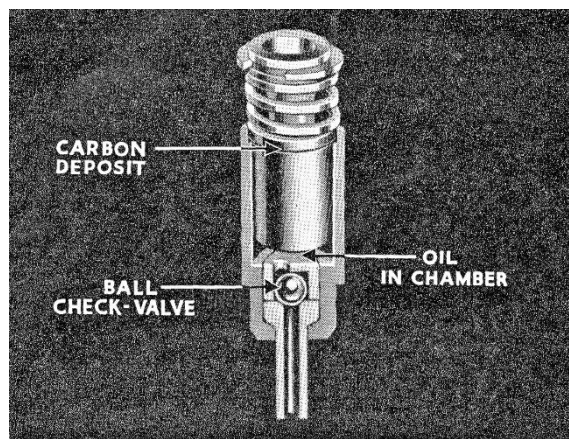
TAPPET FAILURE DUE TO CARBON.
